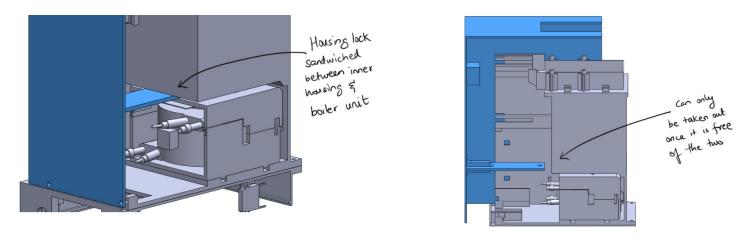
Example of how the housing lock could look and its impact on on the method of taking the housing out
